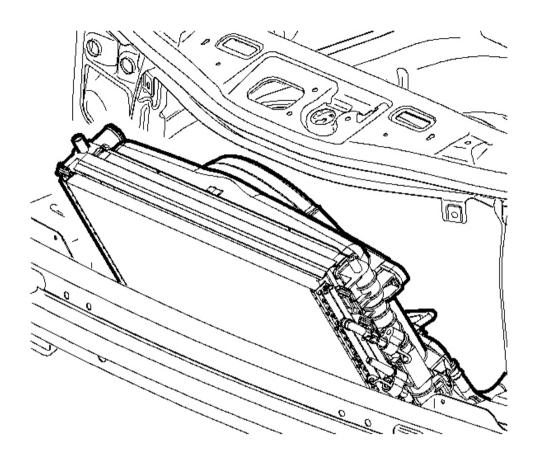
View Of CRFM Assembly From The Lower Mounts Courtesy of GENERAL MOTORS CORP.
